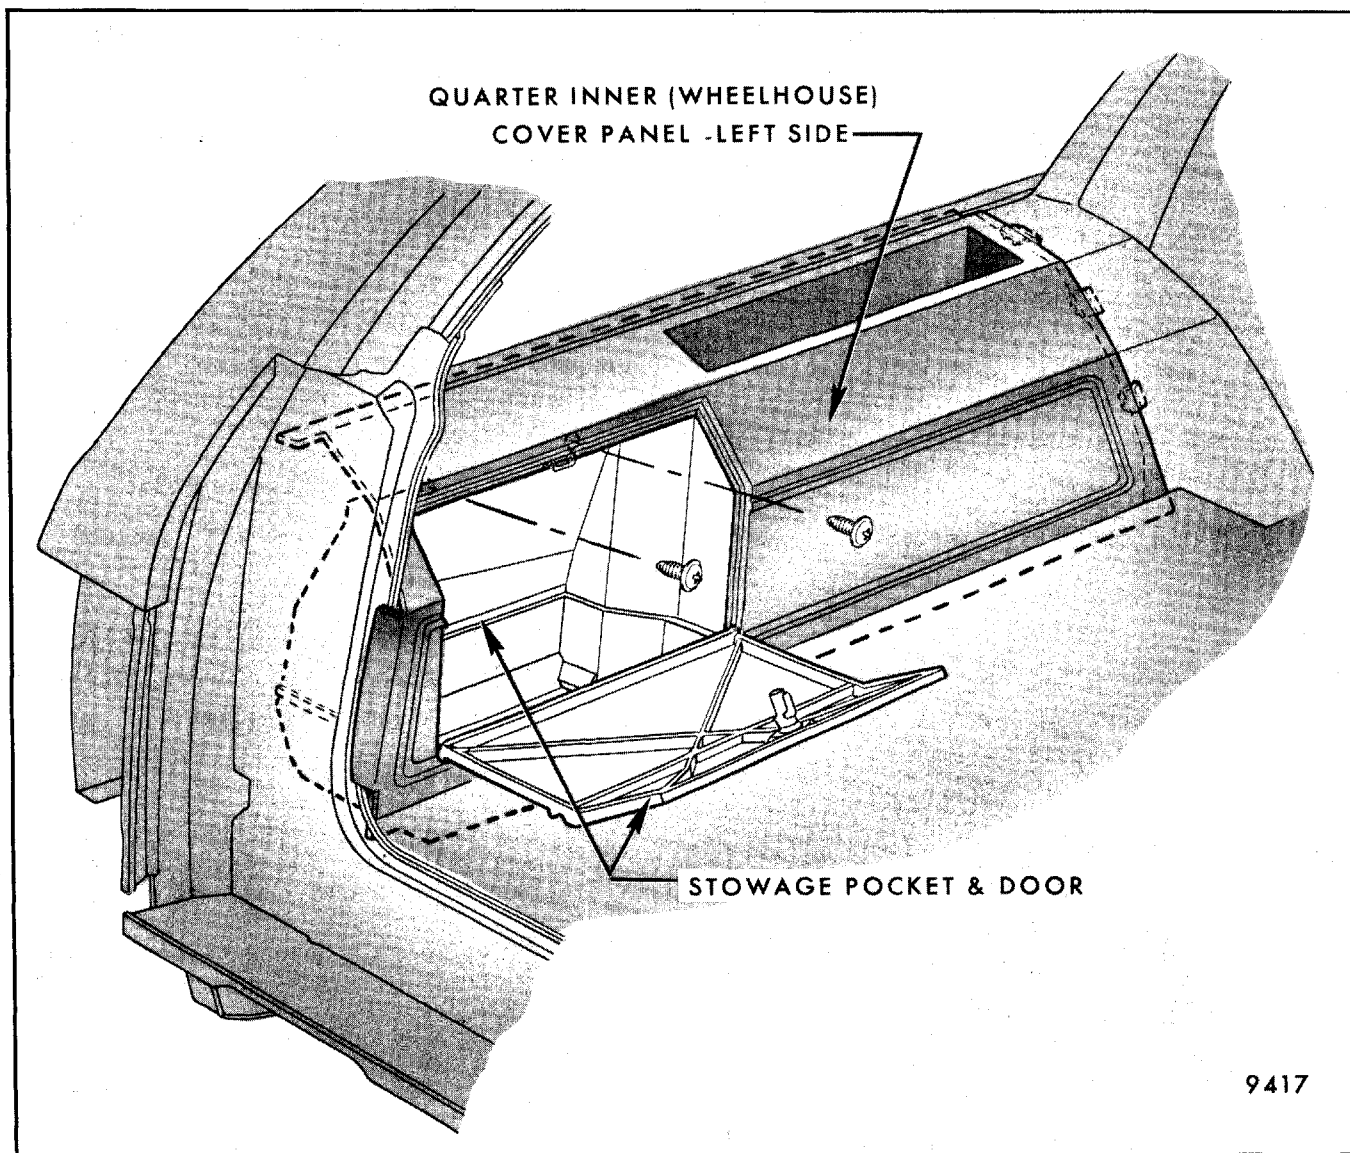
Rear Quarter Wheelhouse Trim Cover and Stowage Pocket Assembly - "B-35" Styles
